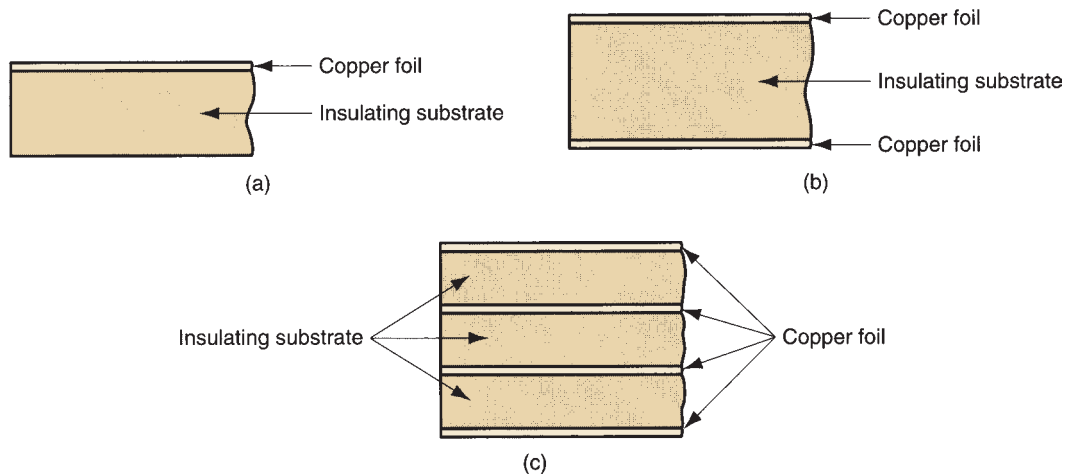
Three types of printed circuit board structure: (a) single-sided, (b) double-sided, and (c) multilayer.
